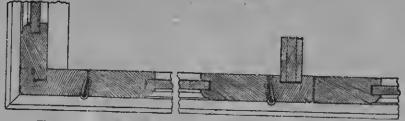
Horizontal Section through Front of Dresser Cupboard.
